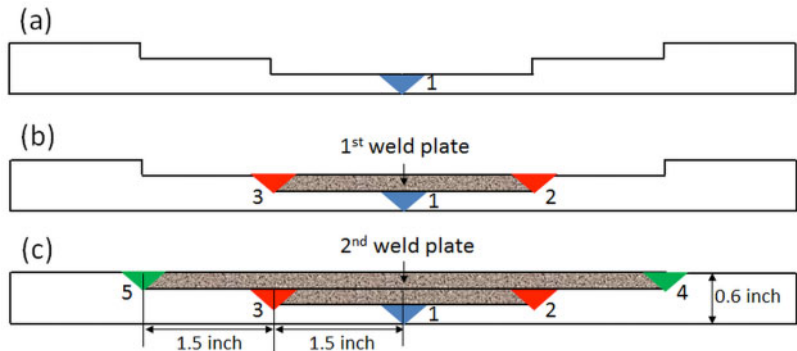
Cross-sections showing (a) Initial butt weld joint design. (b) Insertion of the first weld plate above the root weld. (c) Insertion of the second weld plate above the first weld plate and the final welded structure. Each thickness of top and middle layer was 0.18 inch (4.6 mm) and the bottom layer was 0.24 inch (6.1 mm). The total thickness of MM-FSW is 0.6 inch (15.2 mm). The tool rotation was counter clockwise and into the page.
